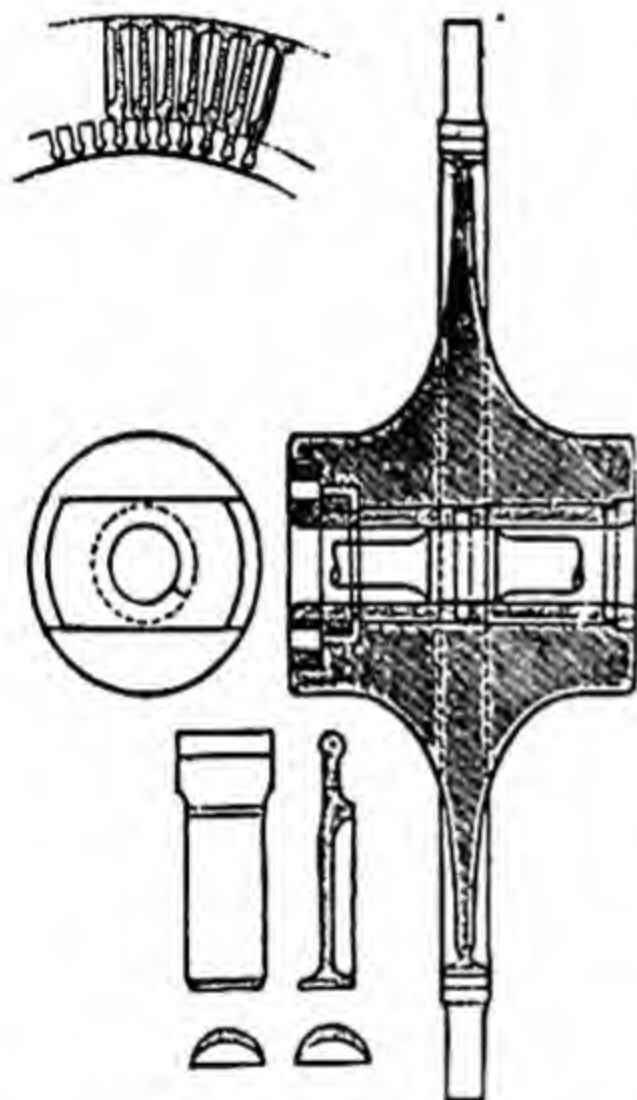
Construction of the wheel and buckets of a de Laval steam turbine.
